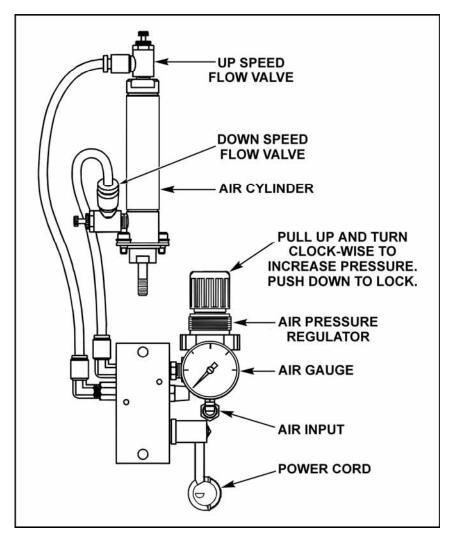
Typical Solenoid Air Valve Assembly with a Single Regulator
